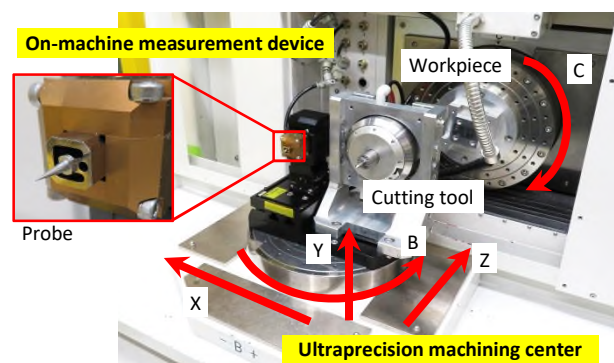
Experimental setup of ultraprecision machining center and on-machine measurement device
